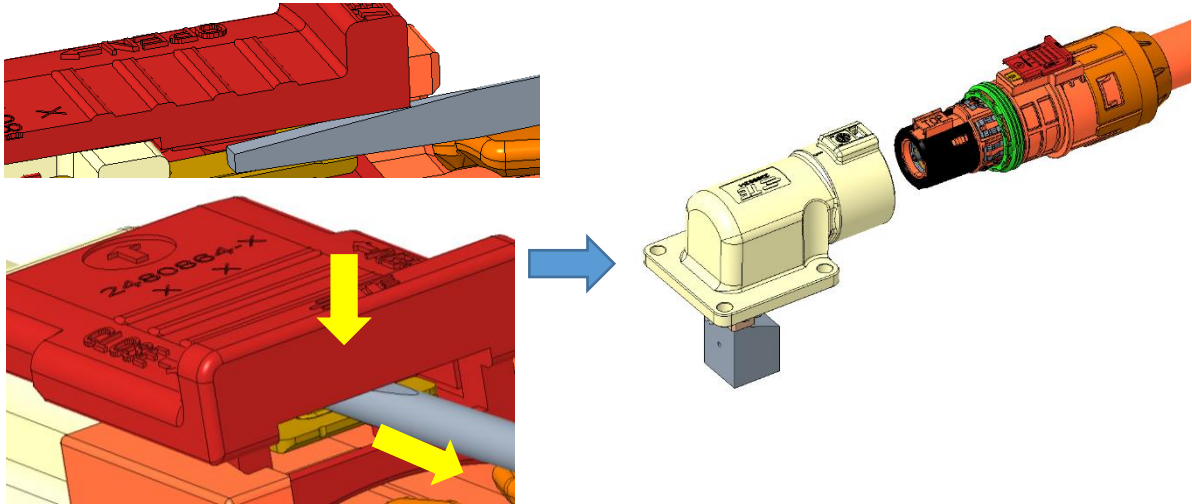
Header assy and plug assy un-mating condition (Tool access)
